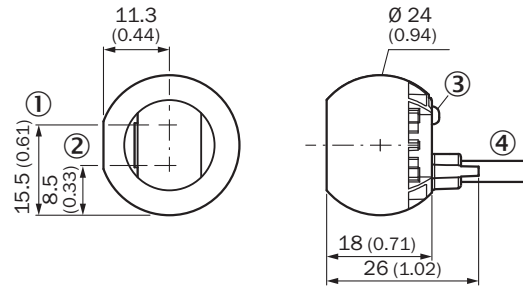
ZLx18-8xxxxx / ZLx18-Hxxxxx, cable
